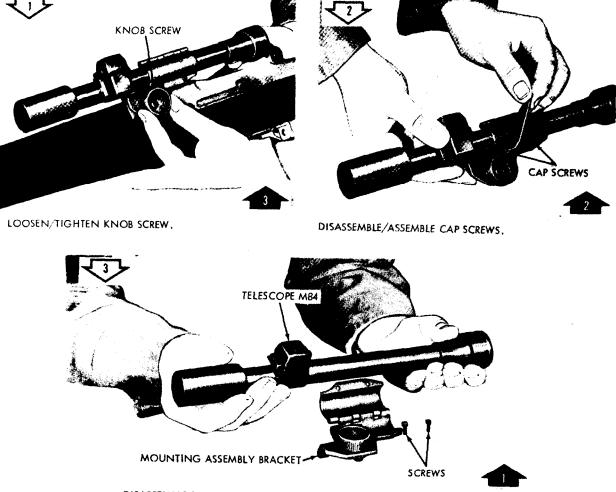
Disassembly/assembly telescope mount assembly for rifle M1C (Sniper's).
